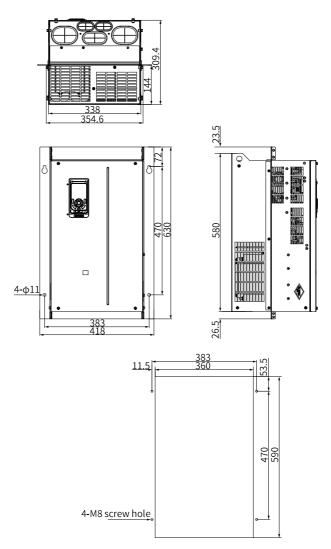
Mounting-hole dimensions (mm) of MD580-AZJ-A2T8
